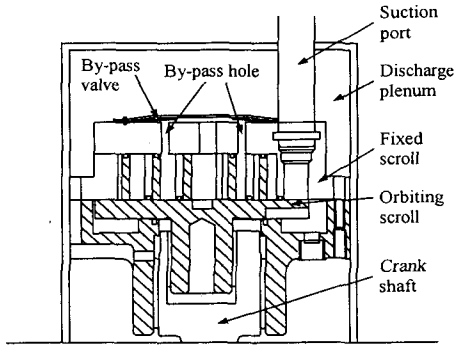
Cross-sectional view of scroll compressor with by-pass valve.
